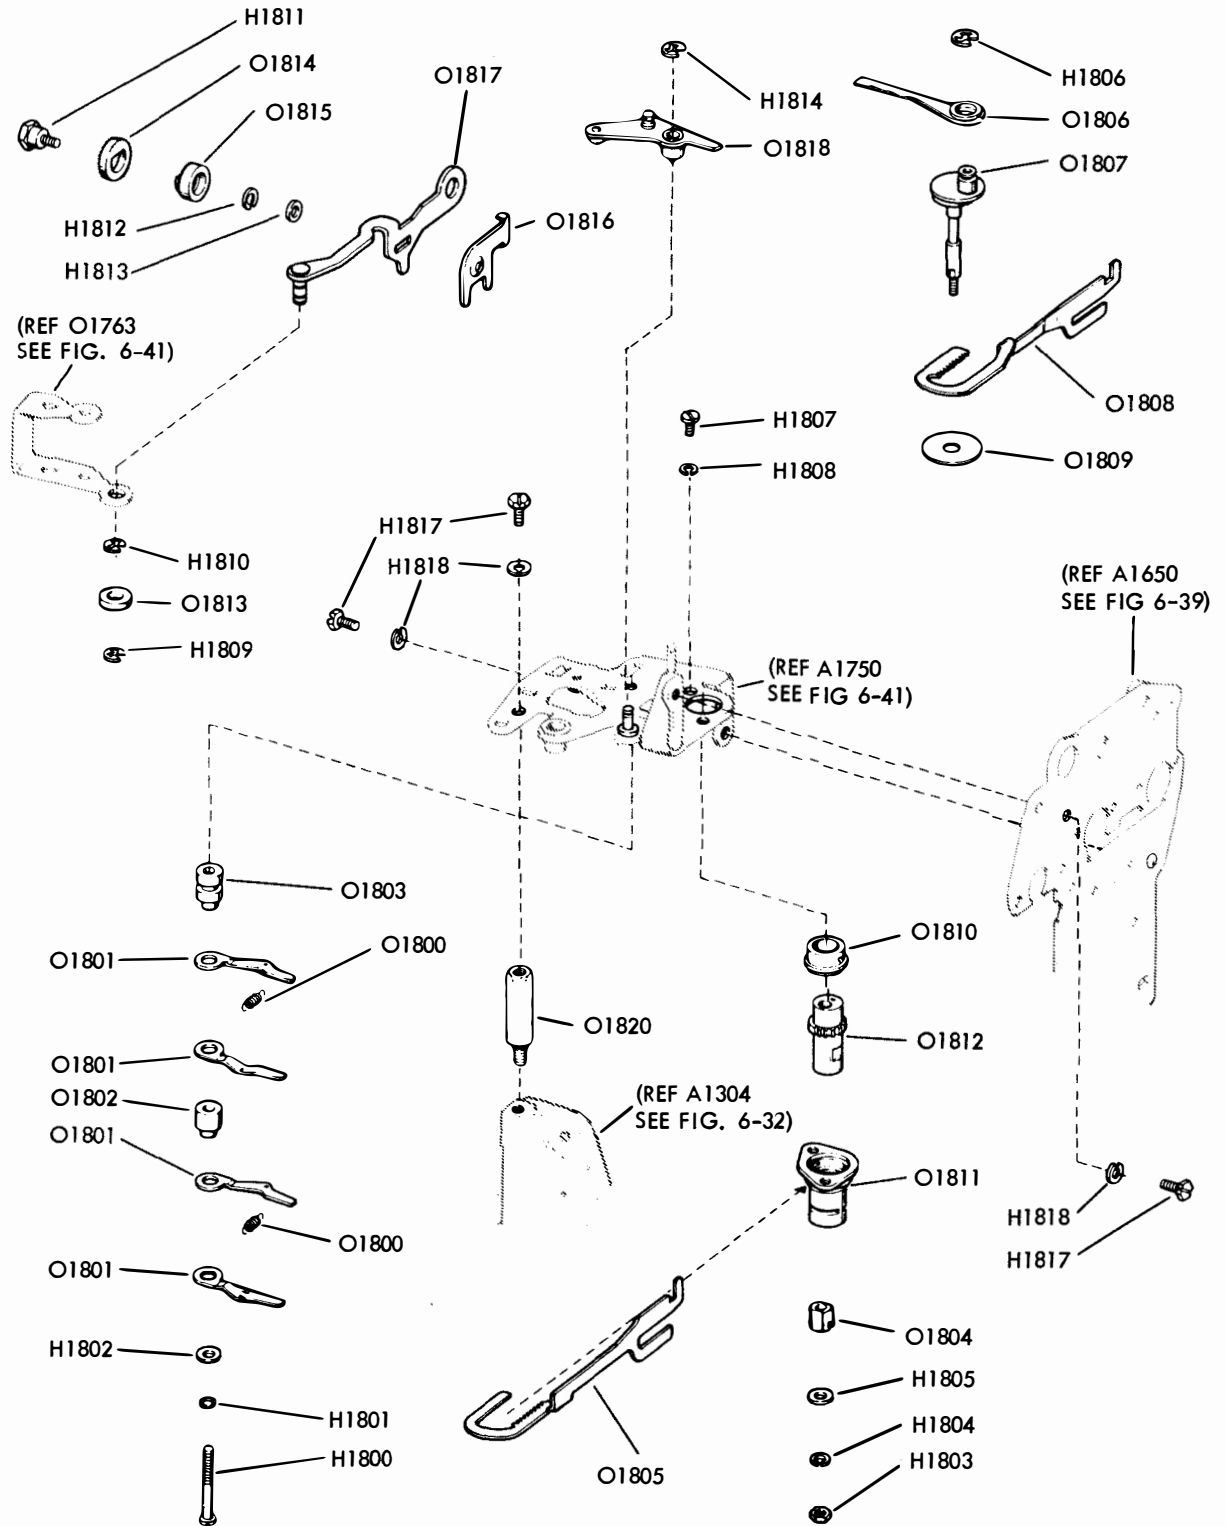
Typing Reperforator, Axial Positioning Mechanism
